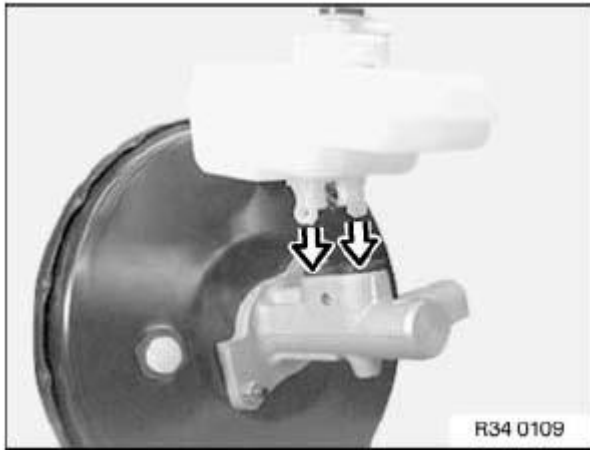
Pushing Expansion Tank Vertically Onto Master Brake Cylinder
